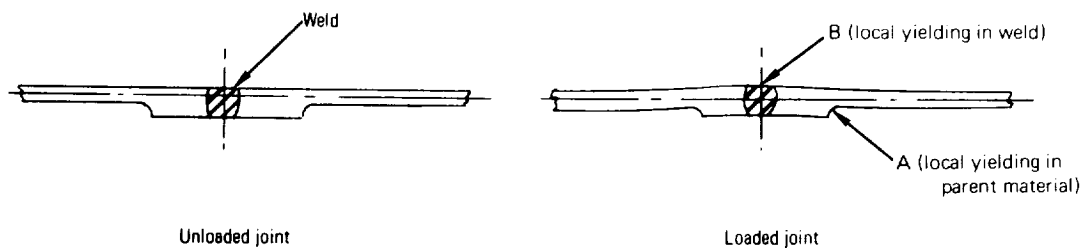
Realignment of an eccentric weld joint under load.
